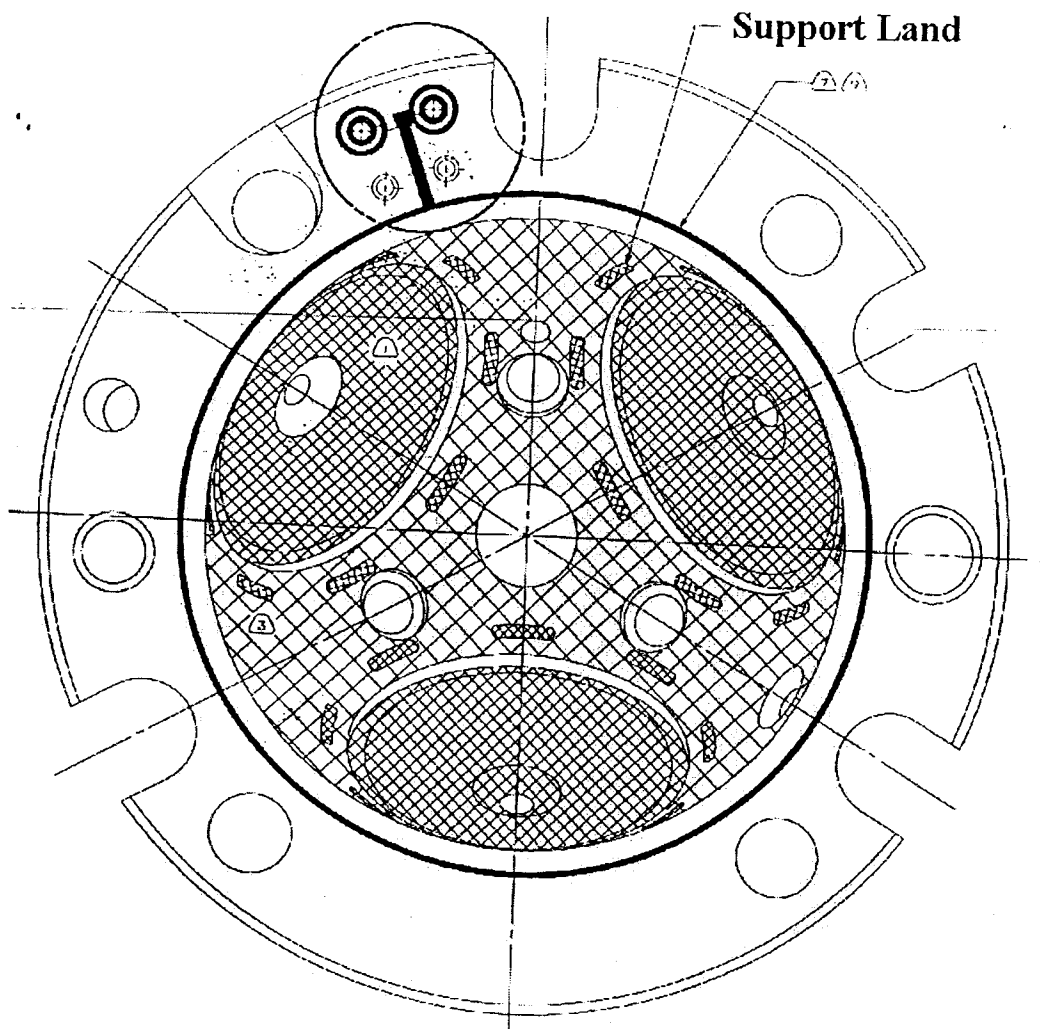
Rotor Support Land Geometry (R-Half of Housing Shown)
